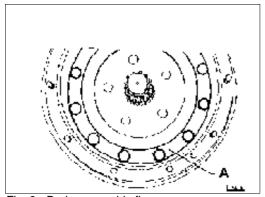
Brake assembly flange A - Brake assembly flange
